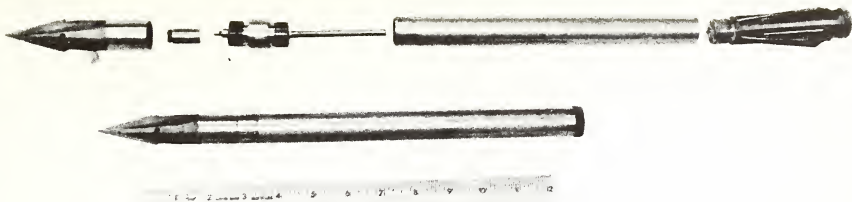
Exploded view of bomb used in shoulder guns. Bomb fired from darting guns (bottom) is identical except it is about 8 cm (3 inches) shorter because flight-vanes are not needed.
